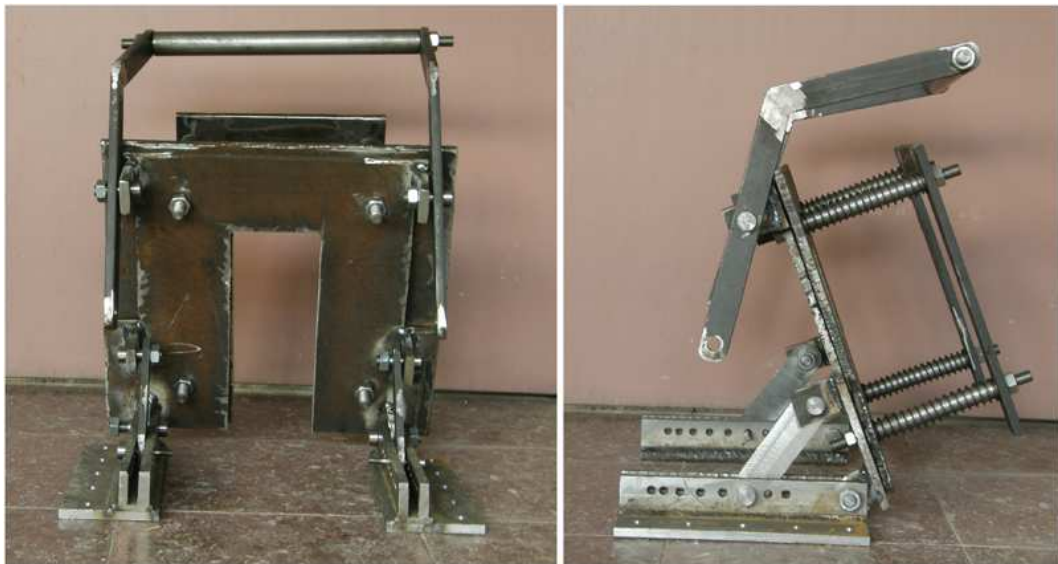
Manufactured Clamping Mechanism (Front and Right Views)
